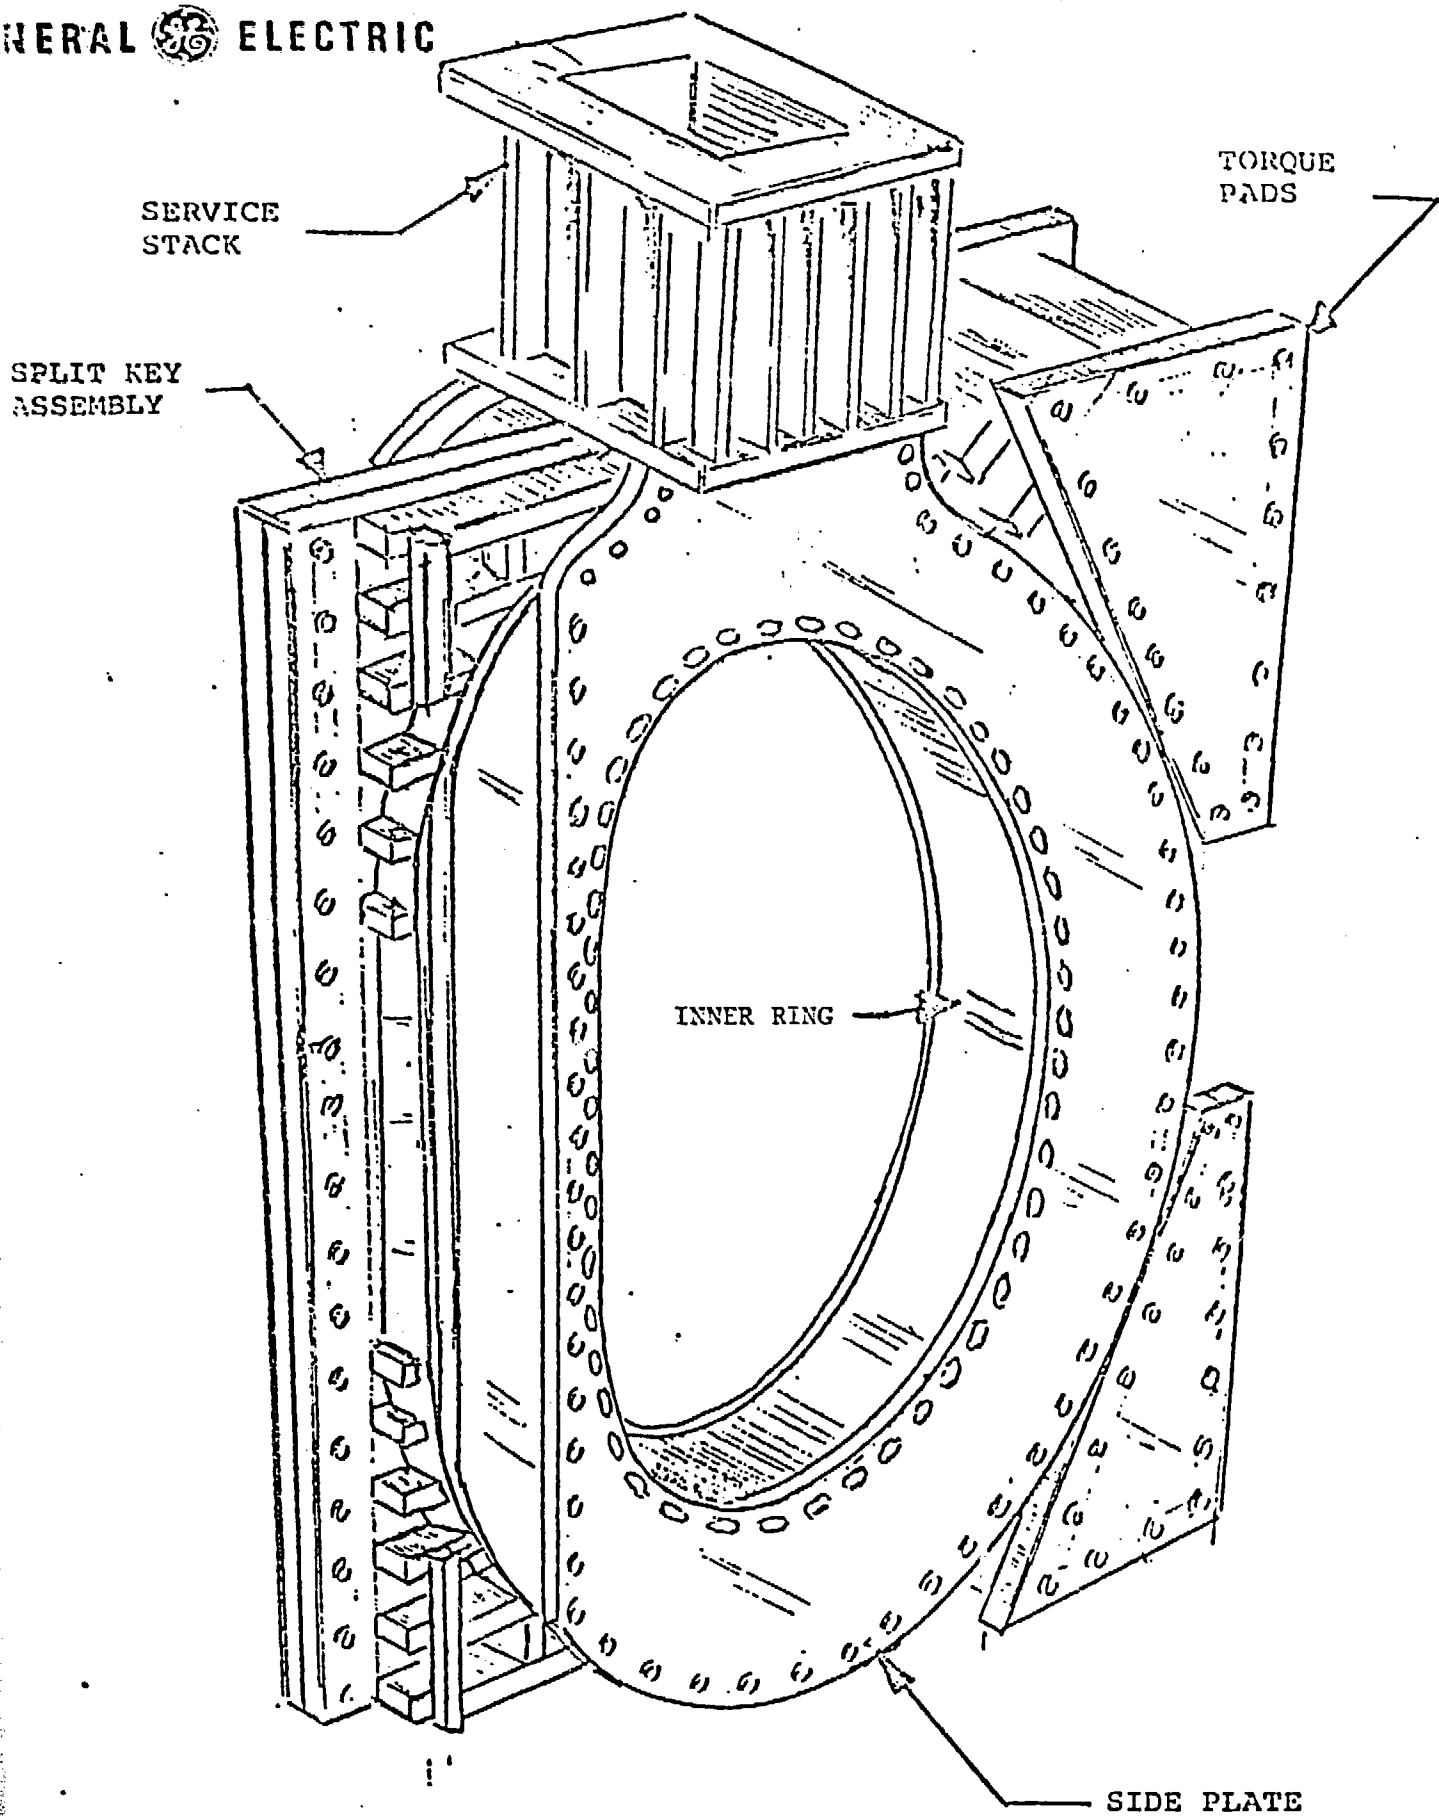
SKETCH OF THE GE ASSEMBLED COIL STRUCTURE
